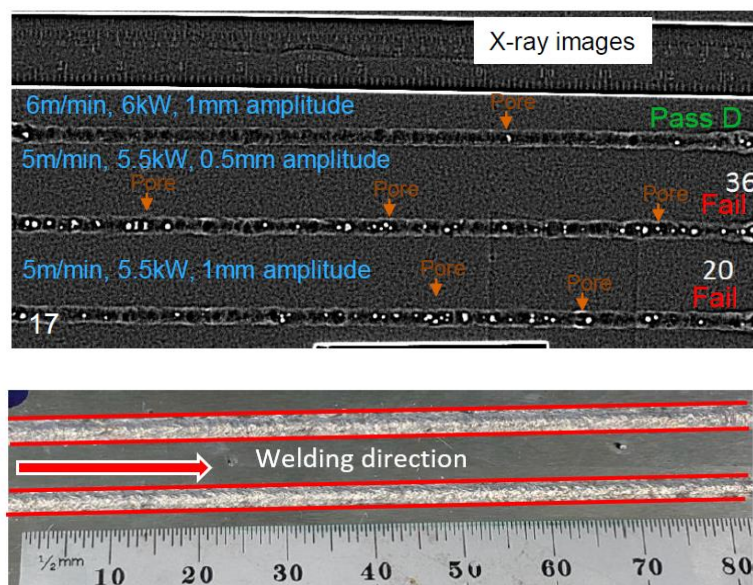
X-ray analysis for Weld top surface- no shielding gas
